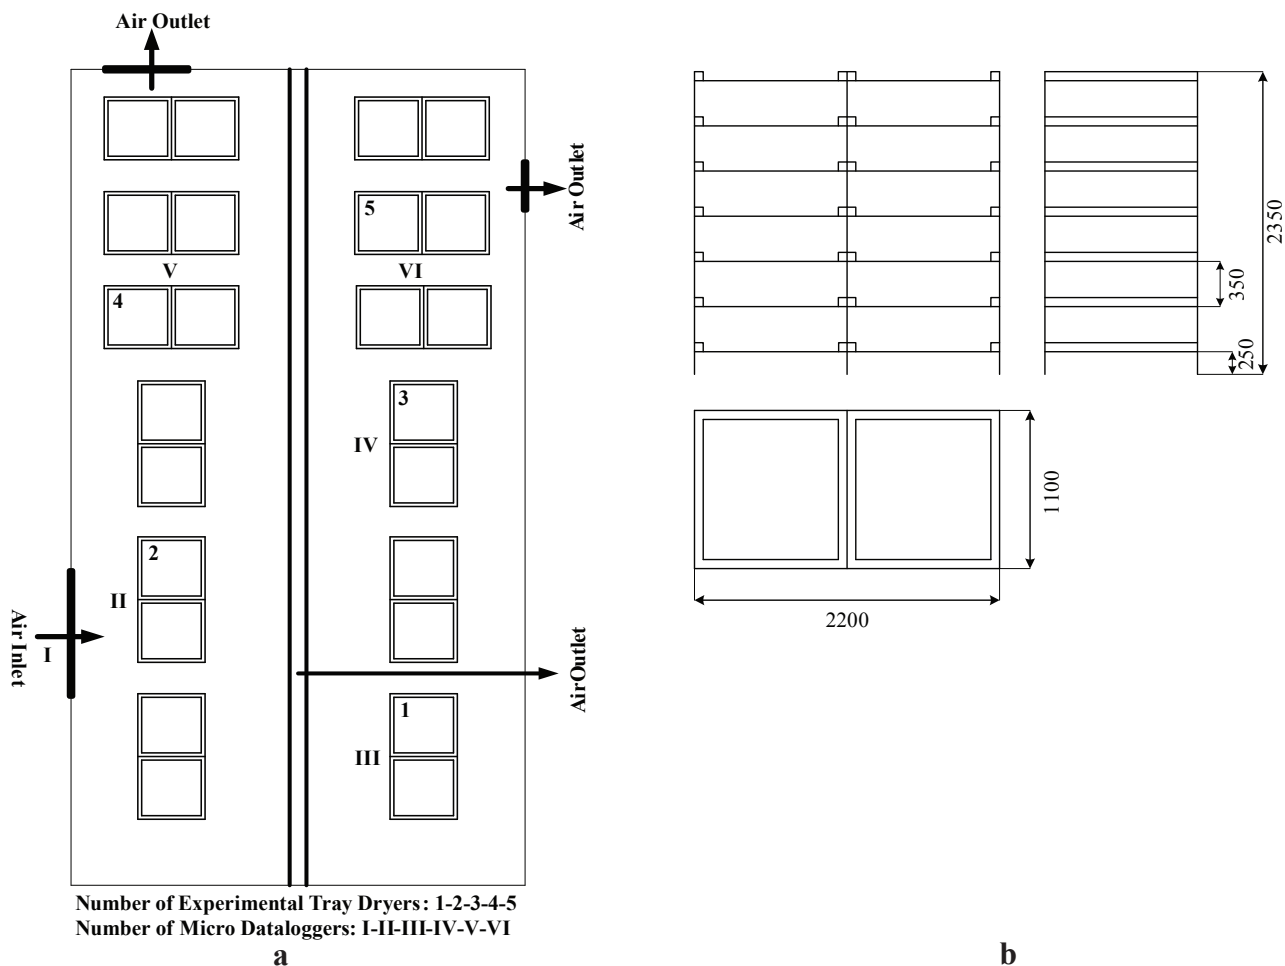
Placement (a) and technical drawing (b) of tray dryers
